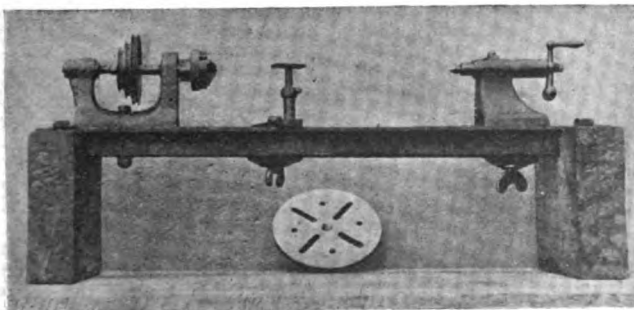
SHOWING MR. J. S. BROWN'S IMPROVED LATHE.
